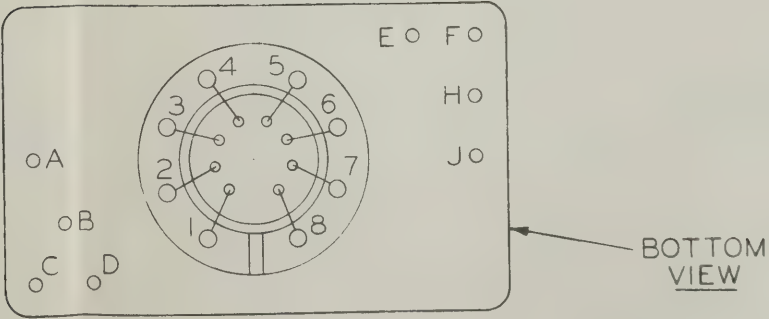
Crystal Calibrator Plug-in Unit, Z1401
